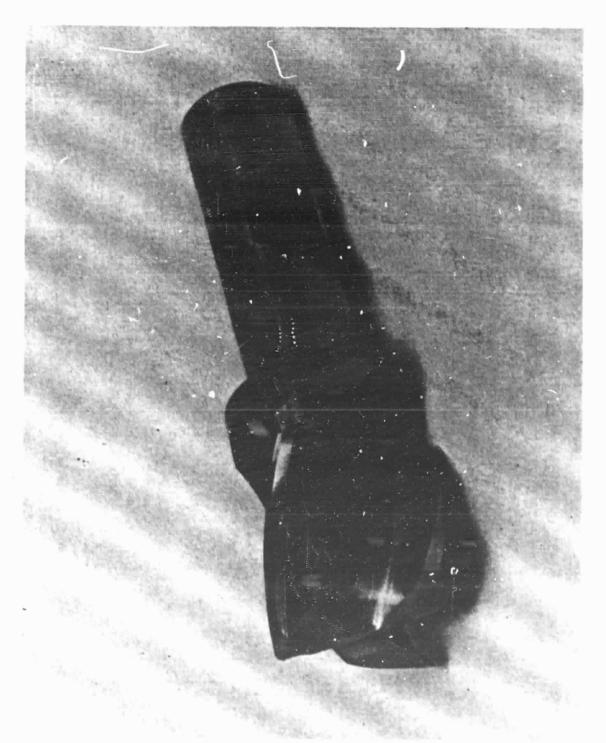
and 3-7 show the 3-flute, 1-1/4 in. diameter end mill chosen as the roughing cutter to be used for removing the major portion of the pocket area between the T-ribs of the panel. The 3/8 in. corner radius end mill chosen for forming the 3/8 in. radii at the base of the T-ribs and for finishing the closed end of the panel is shown in Figures 3-8 and 3-9. This cutter has the same basic geometry as the roughing cutters except for the large radiused corners. Both 1-1/4 in. diameter cutters are made from ASP60 improved high speed steel.
